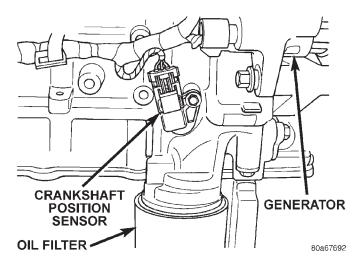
Crankshaft Position Sensor—2.0/2.4L Engines-Typical
